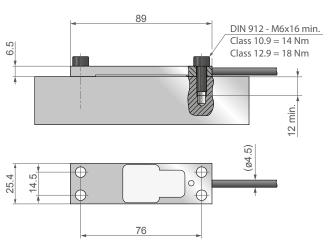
KG-06 dimensions and indication about the tightening torque to be applied to the screws
